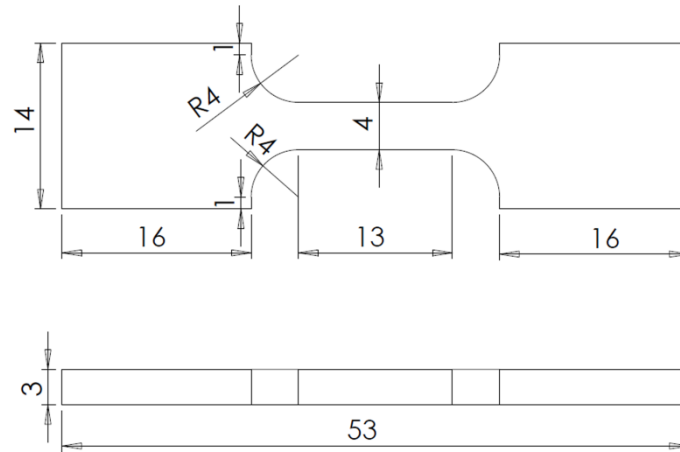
Tensile test specimen dimension (in mm) for the LSHR alloy
